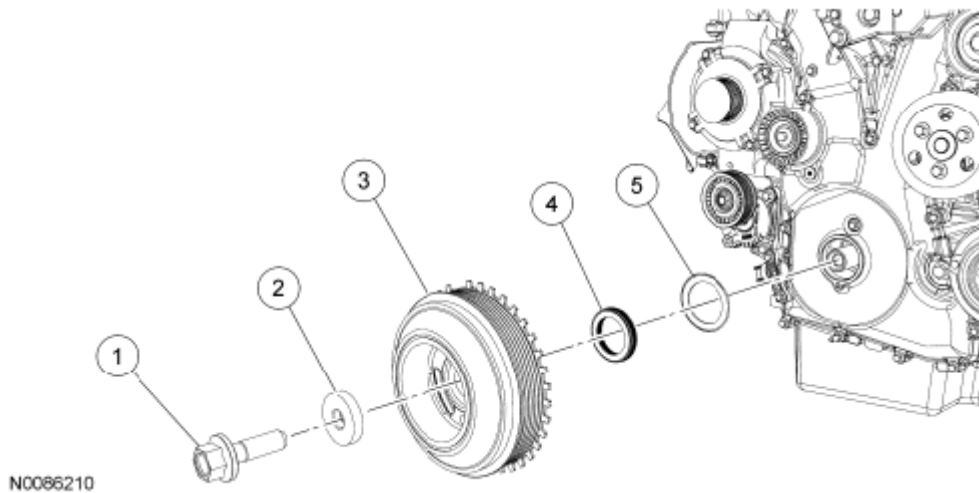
Identifying Lower End Components - Crankshaft Pulley And Crankshaft Front Seal
